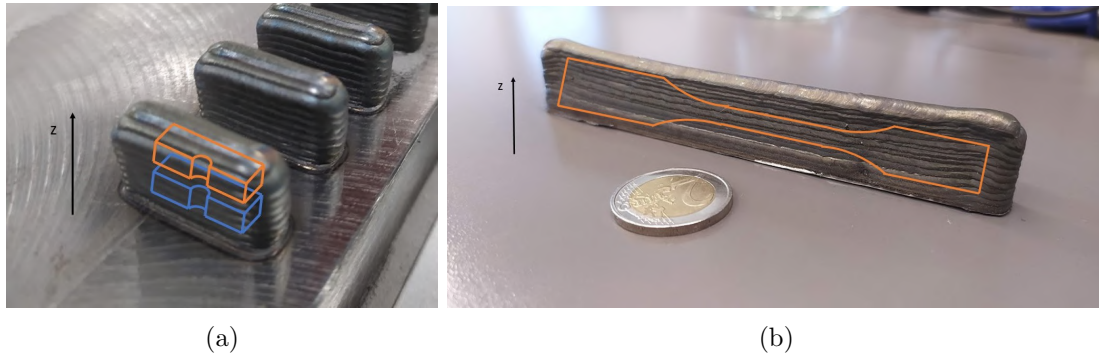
(a) Material deposition of the miniature specimens; (b) Material deposition of the tensile specimens. Z-axis represents the building direction.
